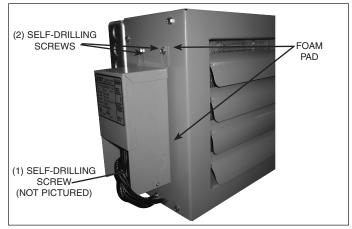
HSB/HC, WTC/WSC Model Bracket Mounted Transformer
